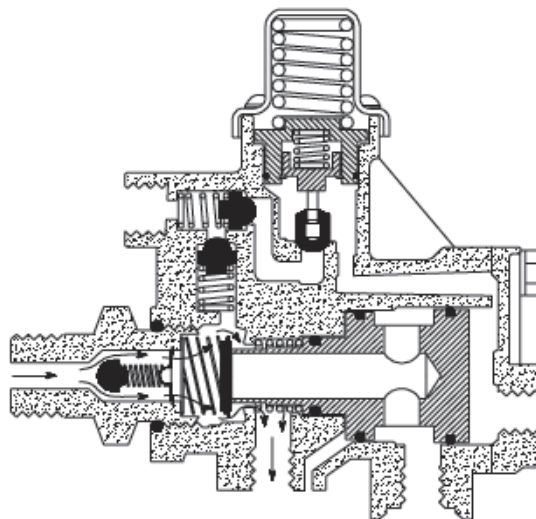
Spring Brake Control Valve – SR3 – Brake System Failure
